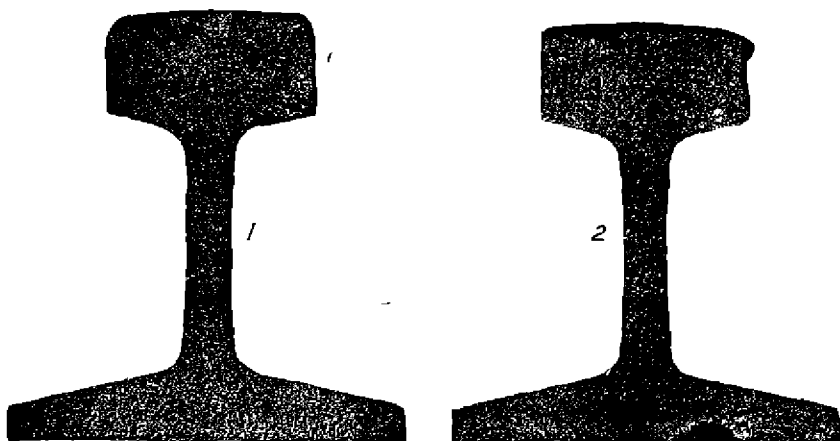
Fatigue fractures developed in vibratory test of two 90 pound rails tested after a term of service in the track
